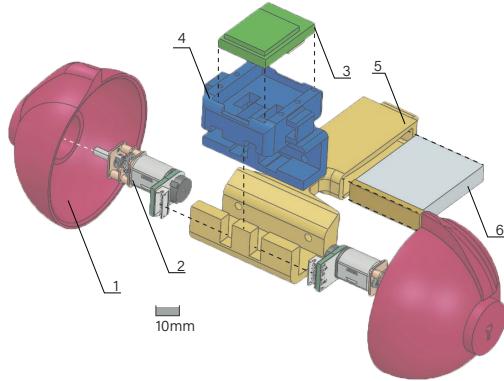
Exploded view of the RESCUE Roller showing 1) hemispherical snail cam wheels, 2) motors with encoders, 3) custom PCB, 4) main chassis, 5) tail, and 6) battery.
